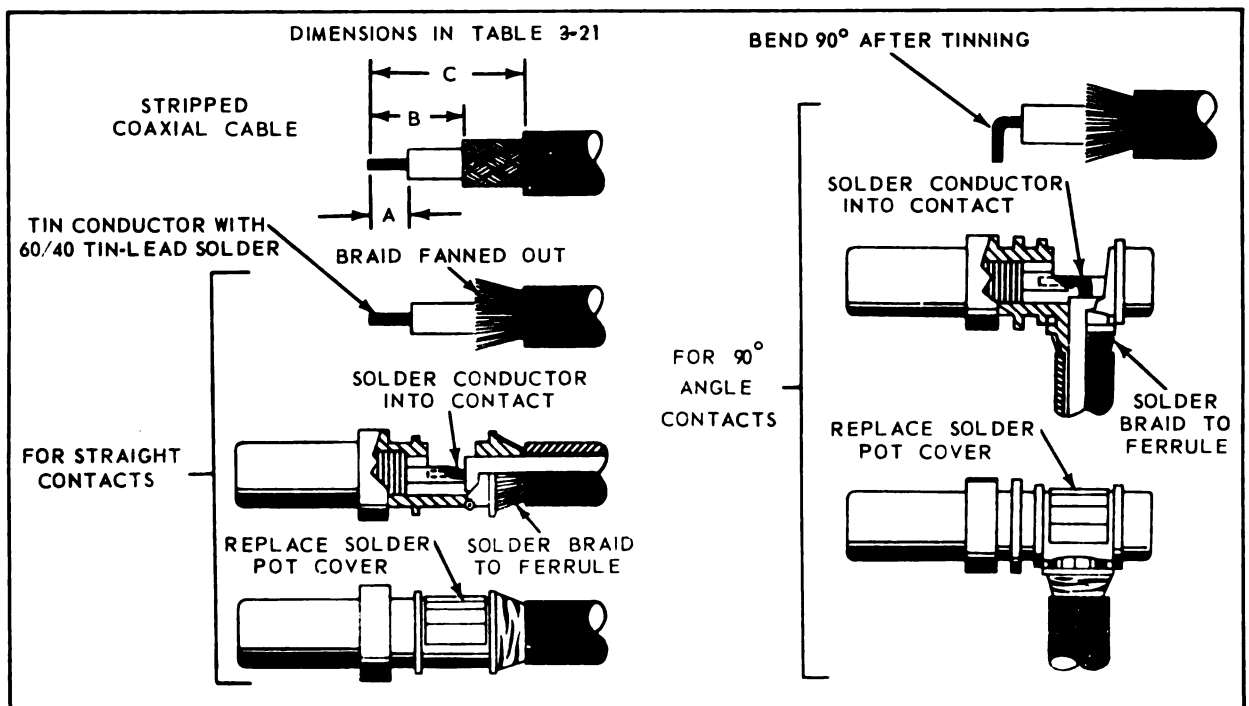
Soldering Coaxial Cable to Contacts for DPD Connector
